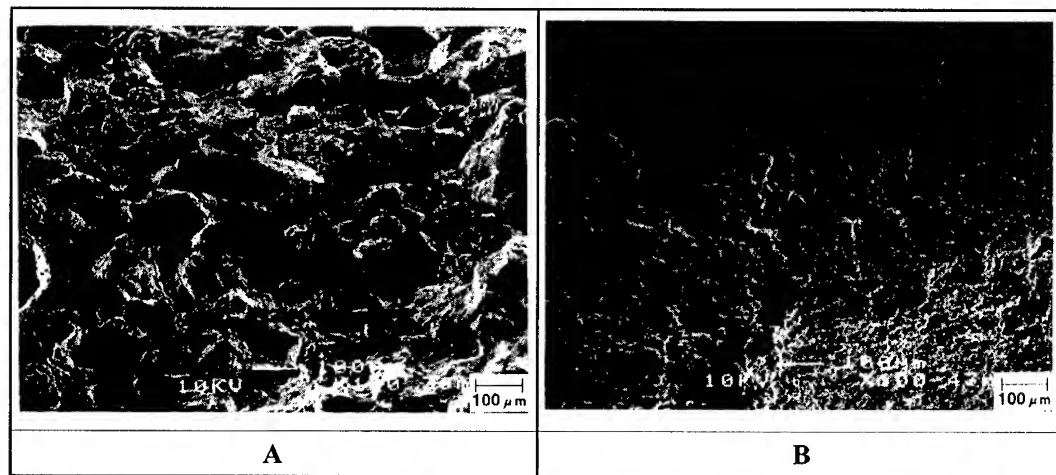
SEM fractography on the fracture surface of the tensile test pieces
